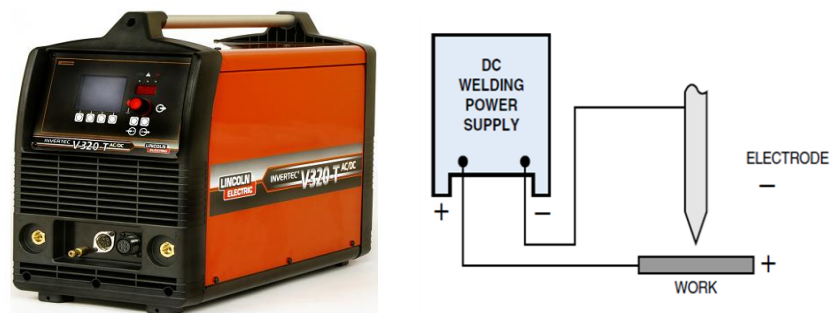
Welding machine with straight polarity (DCSP)
